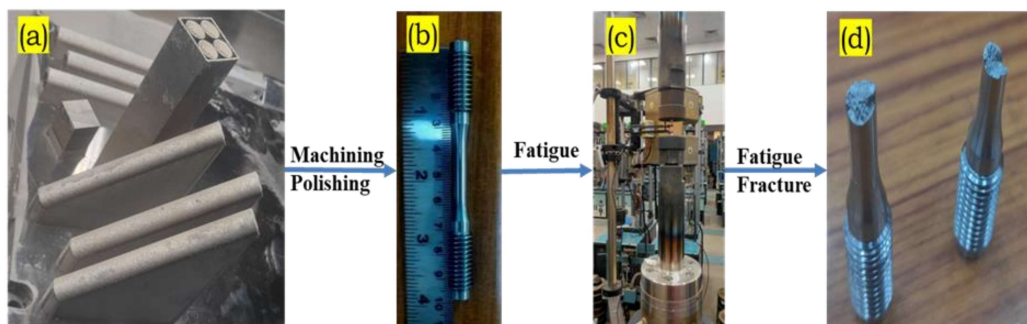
(a) Cylindrical specimens printed via powder bed fusion in 0° , 45° , and 90° build orientation, (b) Machined and polished fatigue samples (c) LCF testing system with extensometer and (d) Fatigue fractured samples.
